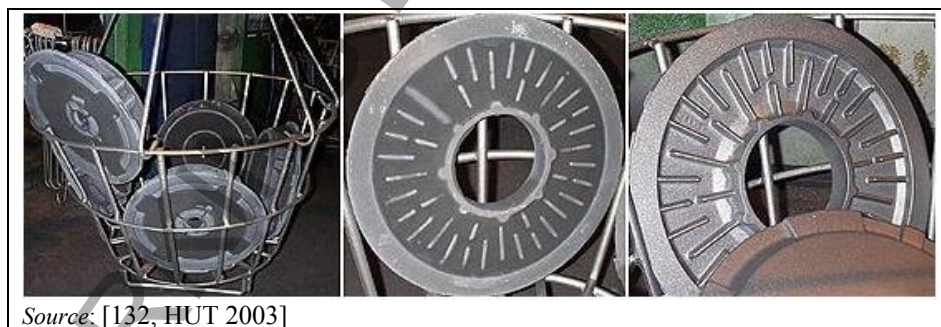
Castings before (L, C) and after (R) sand removal by blasting
